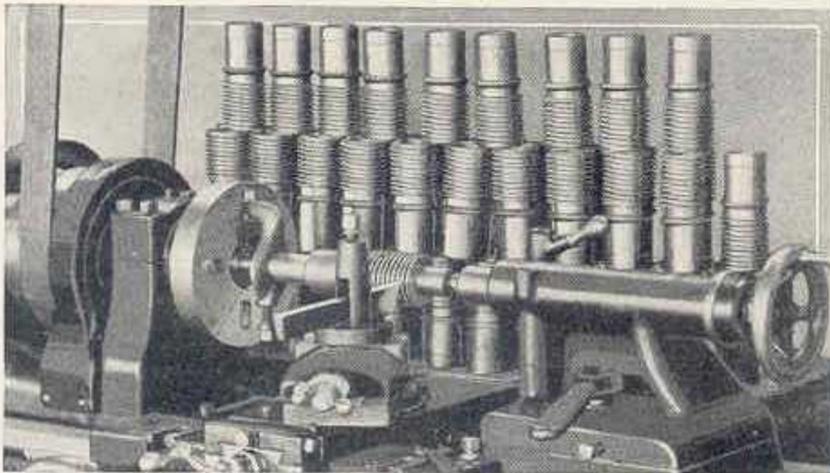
A 9-Inch Junior New Model Lathe on a Manufacturing Job—the Operation is Cutting Threads on Steel Worms.
